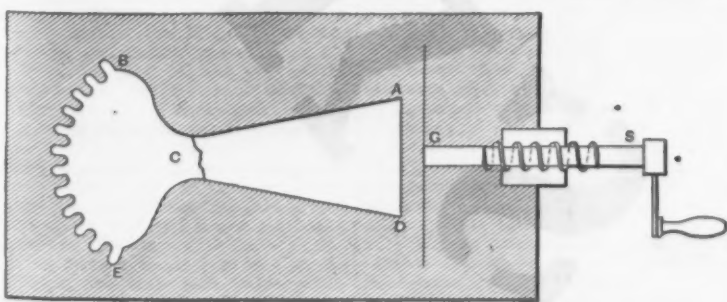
Sectional Plan, Showing Screw Arrangement to Prevent Shrinkage Cracks.
